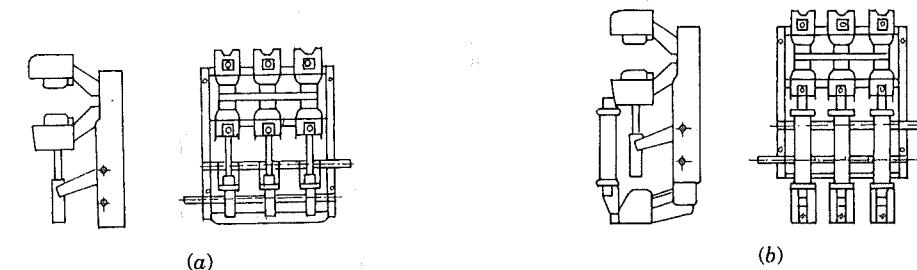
Slide-in type switch-disconnector : (a) without and (b) with fuse assembly
